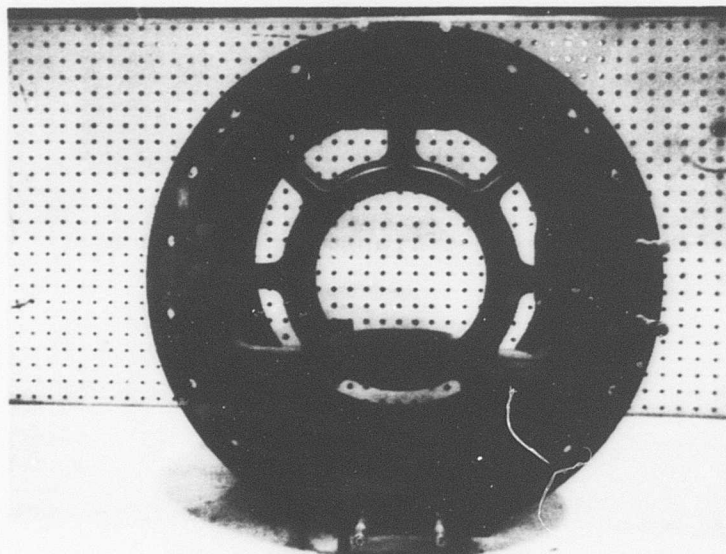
Bottom View of 204-040-353-23 Magnesium Housing.
